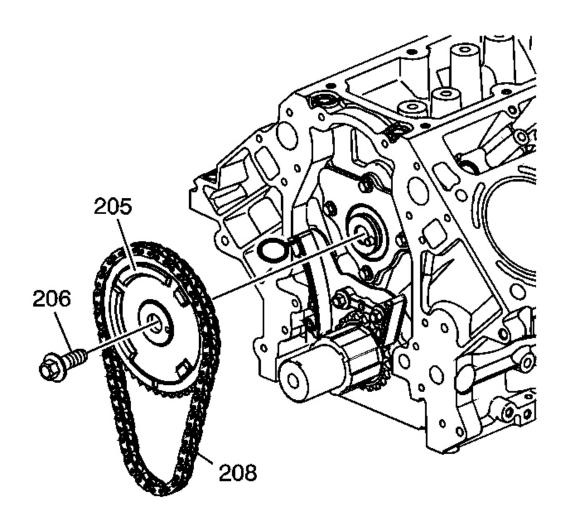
View Of Camshaft Sprocket & Timing Chain Courtesy of GENERAL MOTORS CORP.
